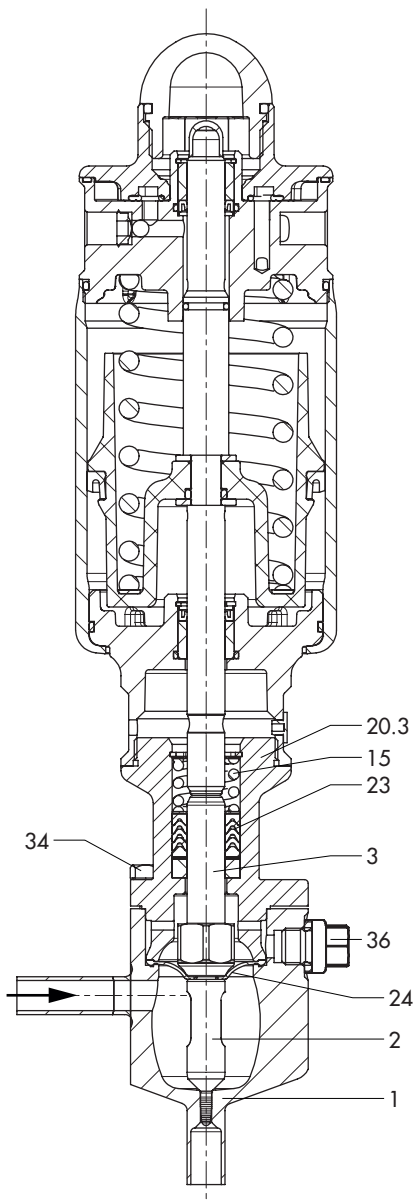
Type 3349 Angle Valve with Type 3379 Pneumatic Piston Actuator
